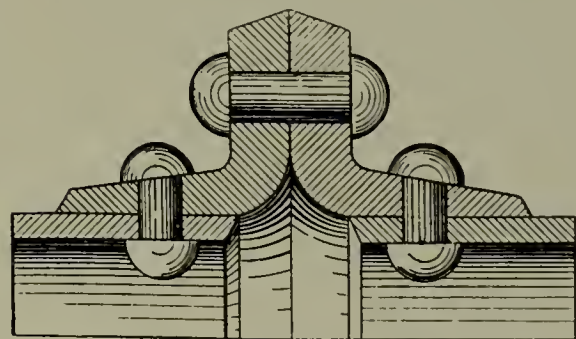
RIVETED FLANGES RIVETED TOGETHER WITHOUT THE USE OF A GASKET
